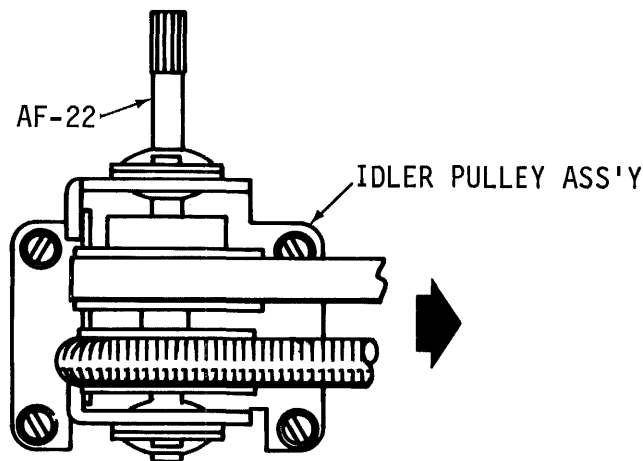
LOCATING IDLER PULLEY ASSEMBLY
